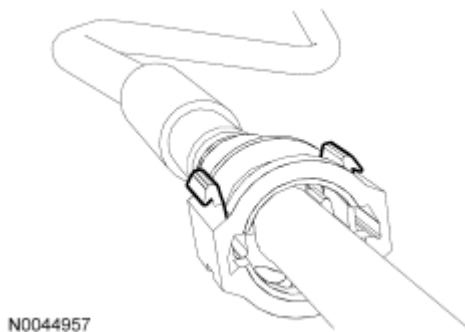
Identifying Locking Mechanism And Quick Connect Coupling Housing
